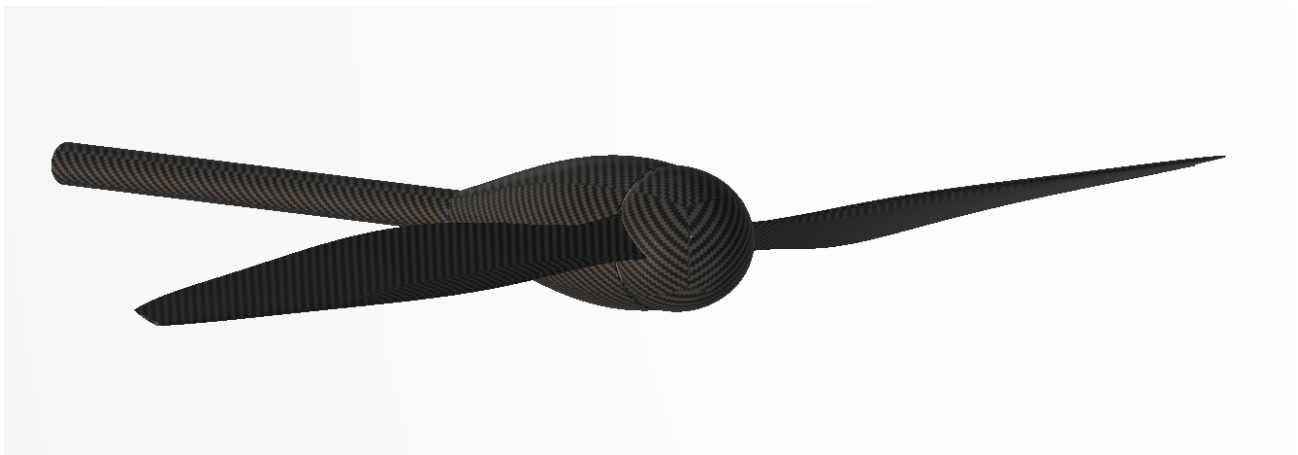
Propeller assembly showing the custom carbon fibre components.
